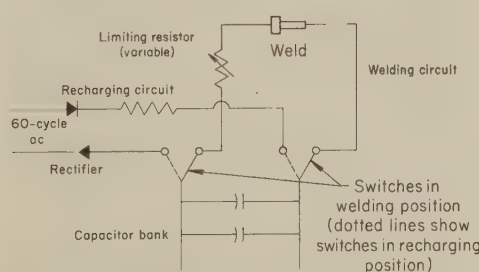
Basic electrical system for nib-starter low-voltage capacitor-discharge percussion welding machines (typical)
